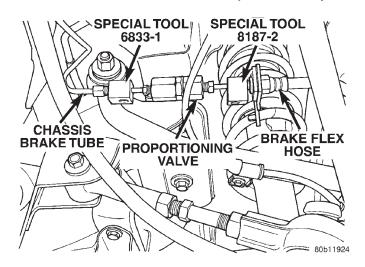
Proportioning Valve With Pressure Test Fittings Installed
